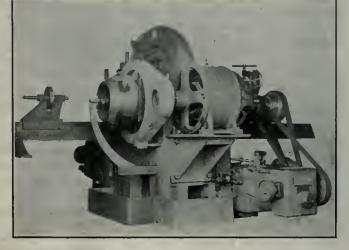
REAR VIEW 12-IN. HEAVY DUTY CUTTING-OFF MACHINE.
